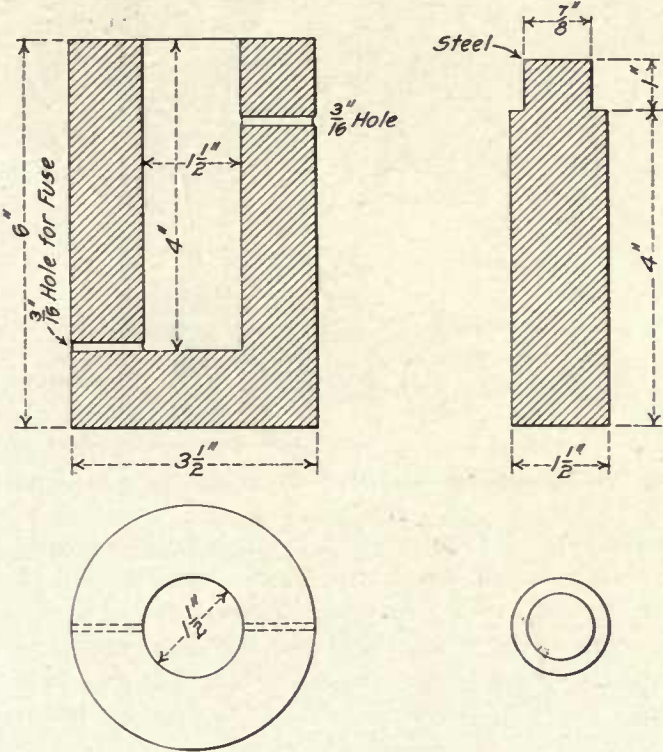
Gun for Shooting Out Frame and Equalizer Bolts.
